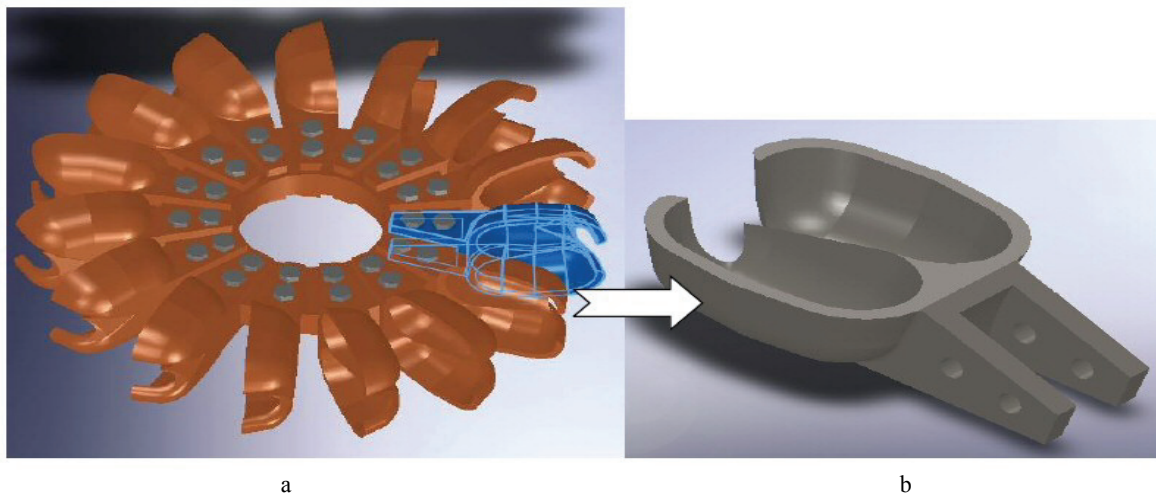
Case study 1: a) The assembled Pelton runner designed in SolidWorks; b) The bucket
